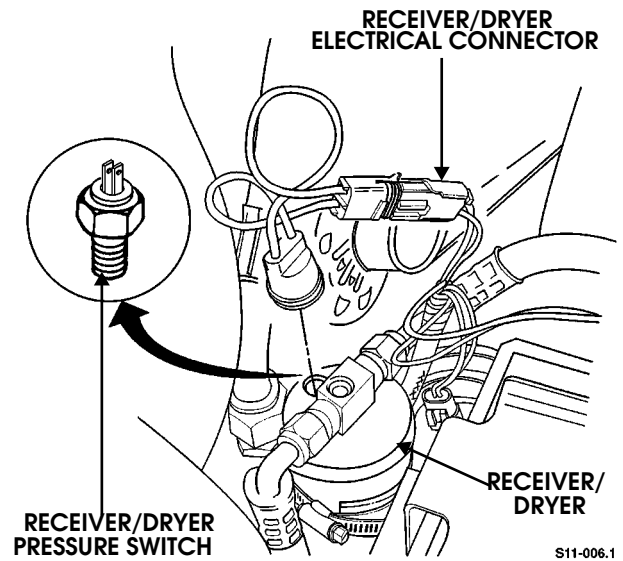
Receiver/Dryer Pressure Switch Mounting
